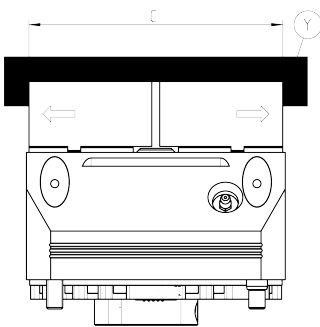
Clamping force block with workpiece "clamped" – Teach position 2, I.D. clamping
